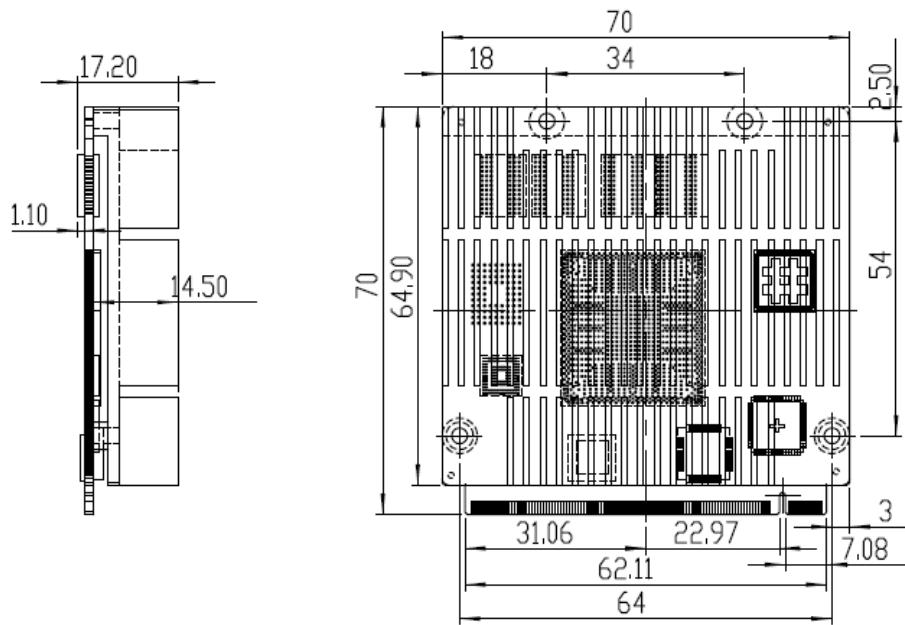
iQ7-BT Dimensions with Heatsink (mm)
